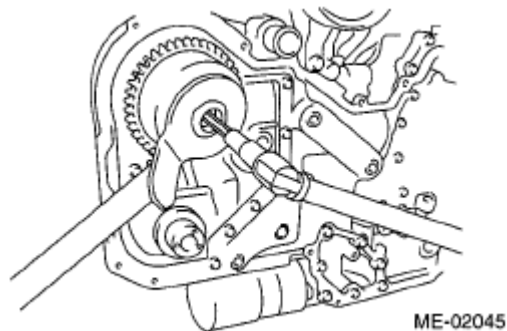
Identifying ST 499977500 Cam Sprocket Wrench
